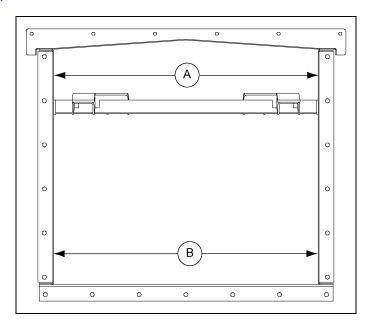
D End View of Trough Section (Liners not shown for clarity.)
